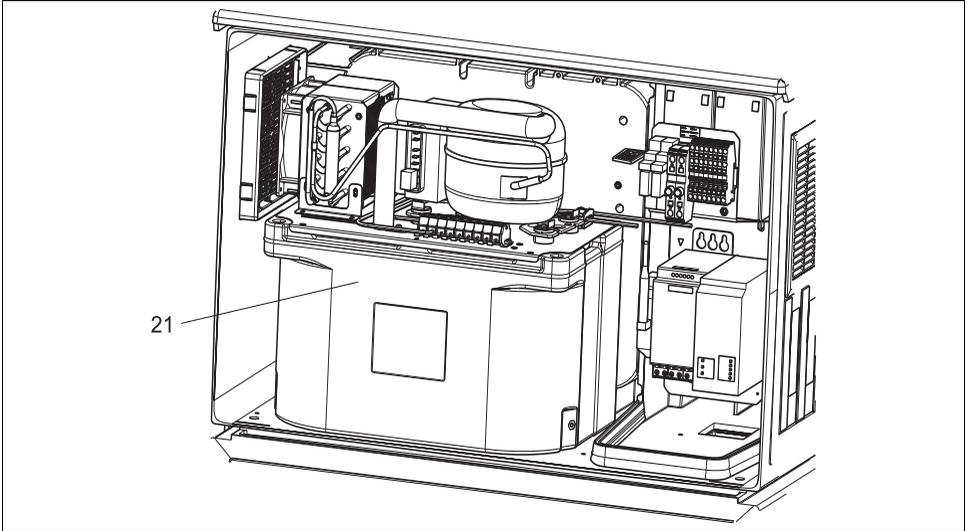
Spare parts for version with vacuum pump (view behind pump holder)
